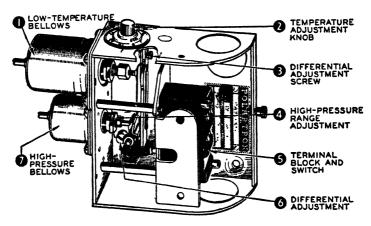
33. (Courtesy Minneapolis Honeywell Regulator Co.)
